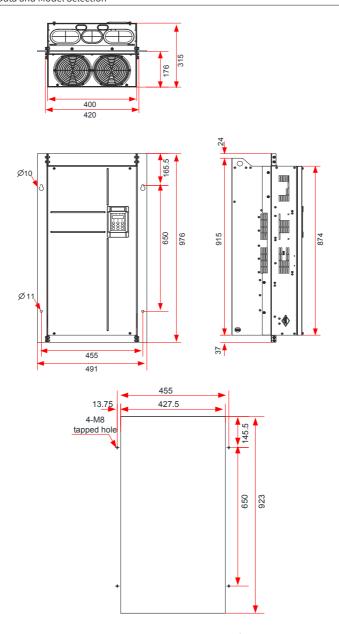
Mounting bracket dimensions and hole spacing for 132–160 kW AC drive models
